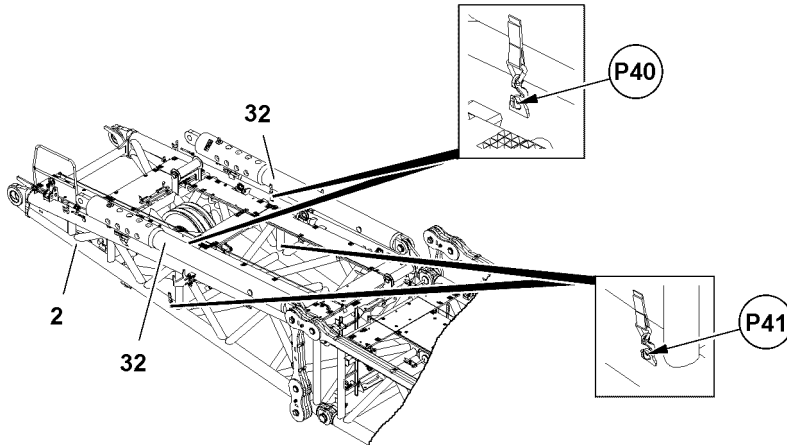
Disassembling WA-frame 2 on the end section — Fastening the relapse supports
